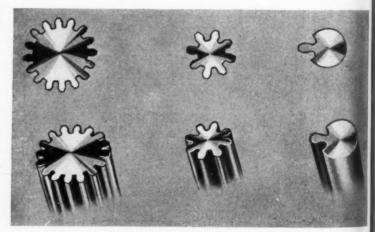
Pinion rods may be accurately drawn which is particularly valuable because of
